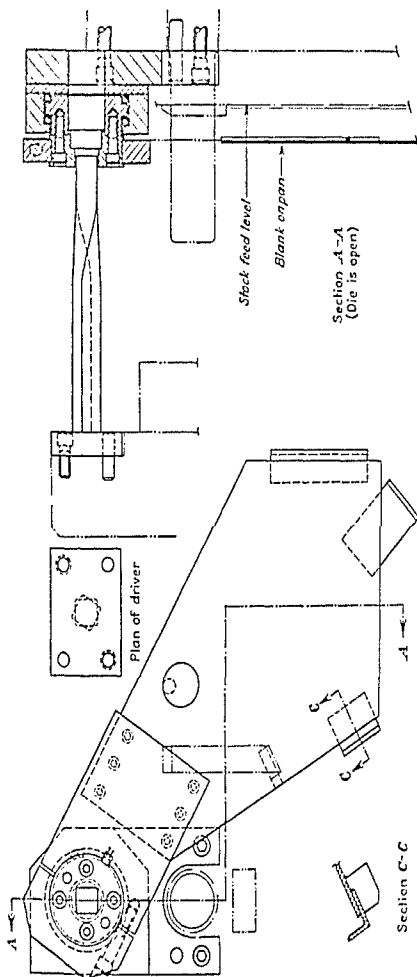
An oscillating die-unloading arm actuated by opening and closing of the die. (Buick Division, General Motors Corp.)
